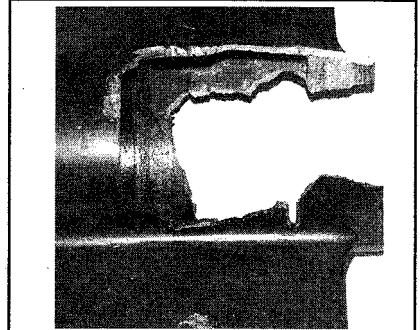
This lower unit was destroyed because the bearing carrier froze due to lack of lubrication
